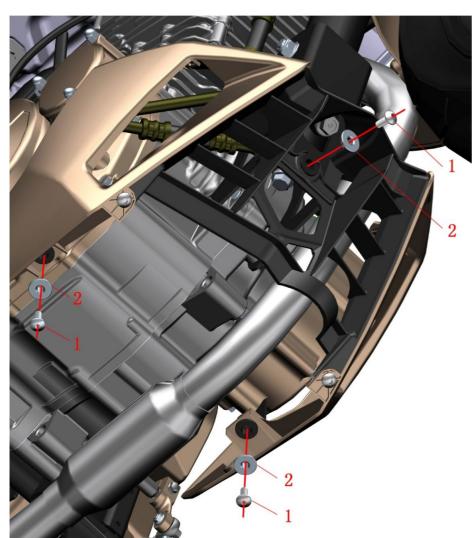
LOWER WIND DEFLECTOR COMPONE		Lower air guide sleeve component-1	CHK	6
